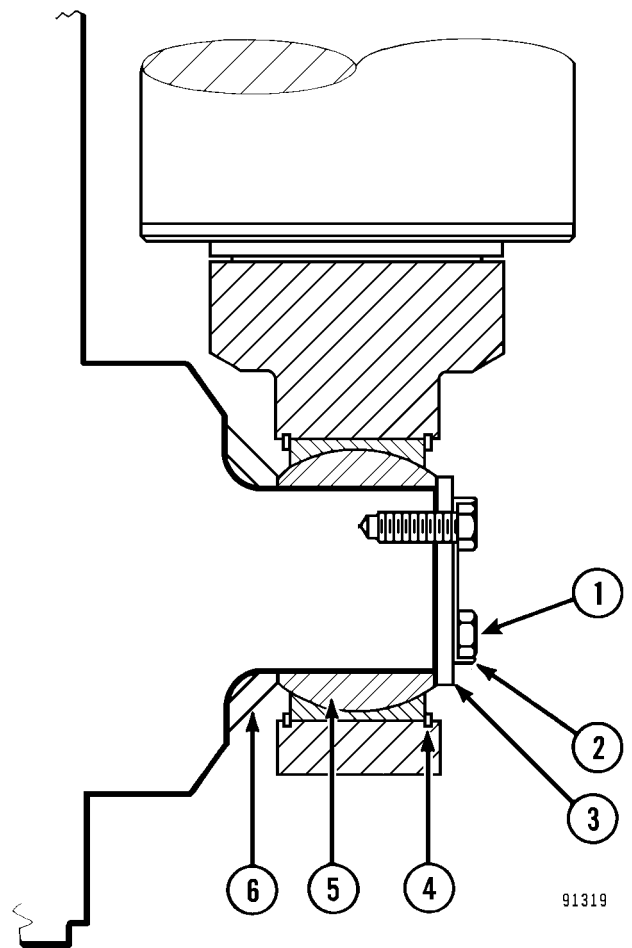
HOIST CYLINDER LOWER MOUNT
